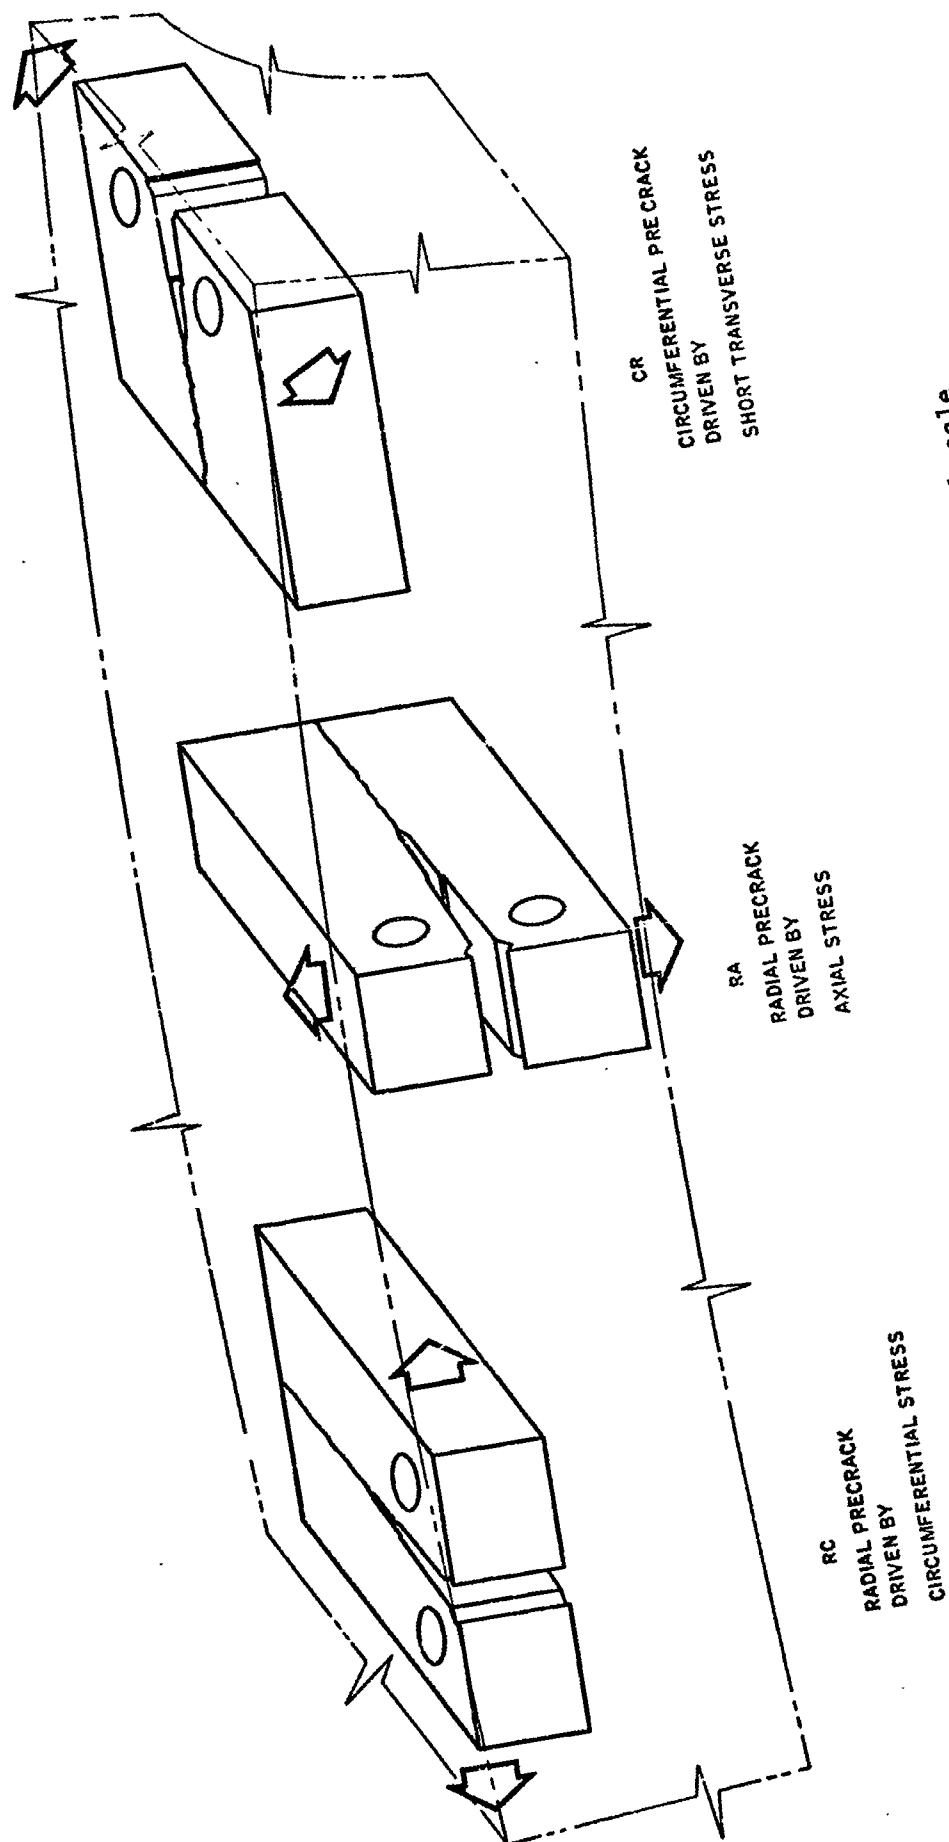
Specimen Orientation for AA7039-T63 Subscale Pressure Vessel Forging Flange Section
